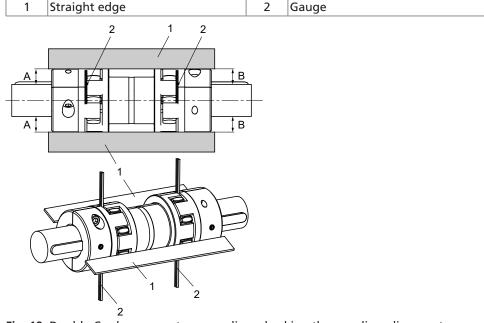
Double Cardan spacer-type coupling, checking the coupling alignment
